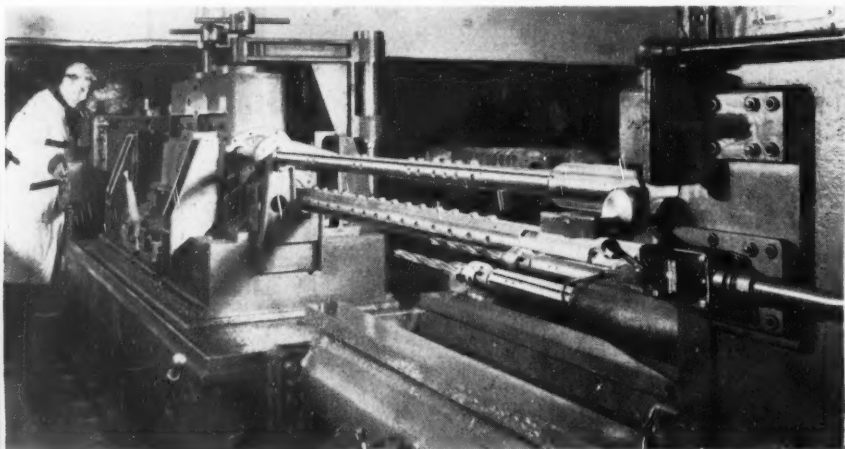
Cam and Crank Bearing Holes are Finish-Bored with This Special Natco Two-Way Boring Machine, Equipped with Davis Bars
